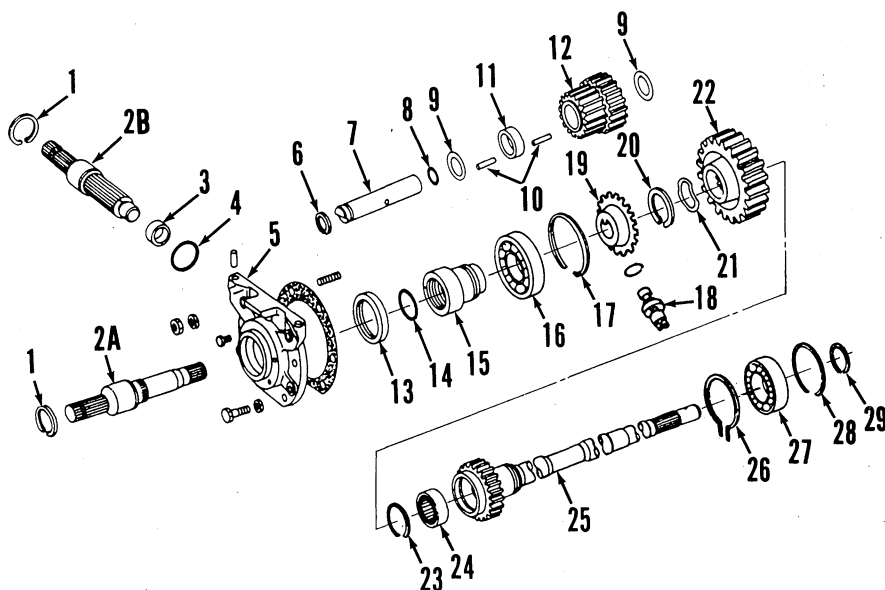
Exploded view of pto reduction gears, output shafts and related parts used on all Power Shift tractors equipped with dual-speed pto.
